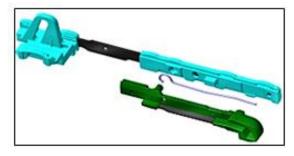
New mechanical structure diagram: guide block + lock block + compression spring assembly.
